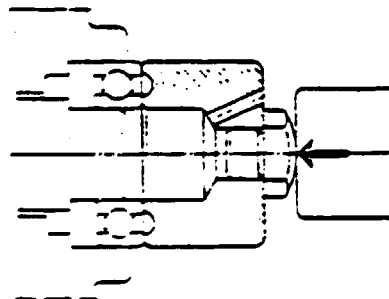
Installation of a self-supporting bearing, simultaneously on the shaft and into the housing, with an impact cover.
